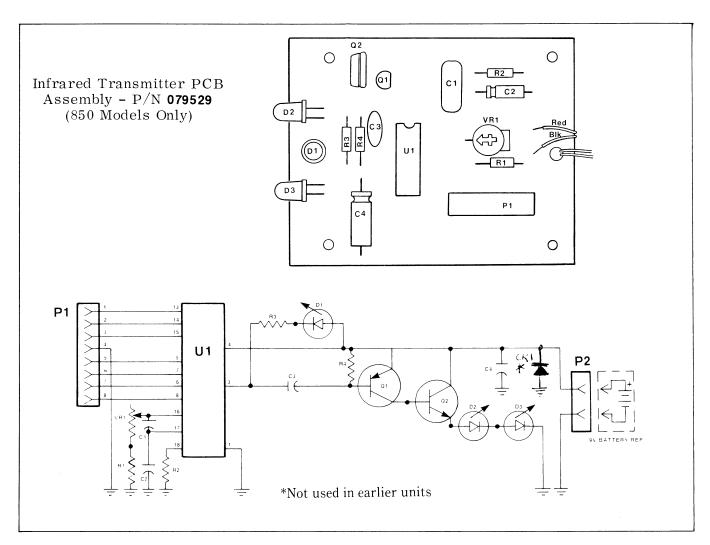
Infrared Transmitter PCB Assembly Schematic Diagram (850 Models Only)
